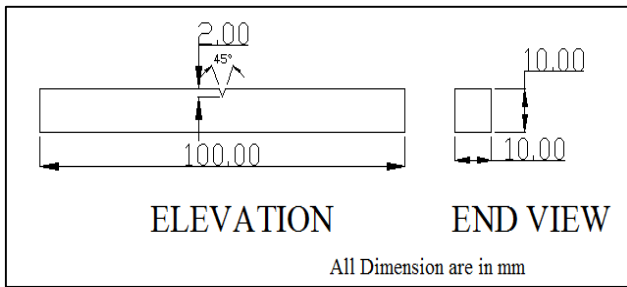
Izod Impact Test Specimen (As per ASTM)
